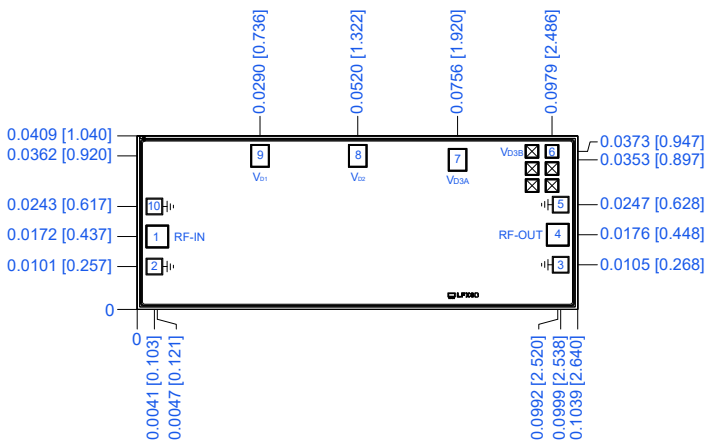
PMA4-6263LN-D+ Outline Drawing.
